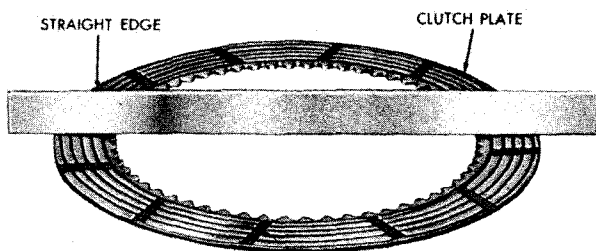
Method of determining amount and direction of clutch plate cone
